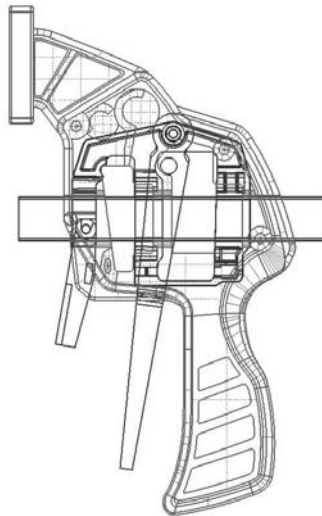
Typical assembly drawing. (Reprinted with permission of Irwin Industrial Tools.)
